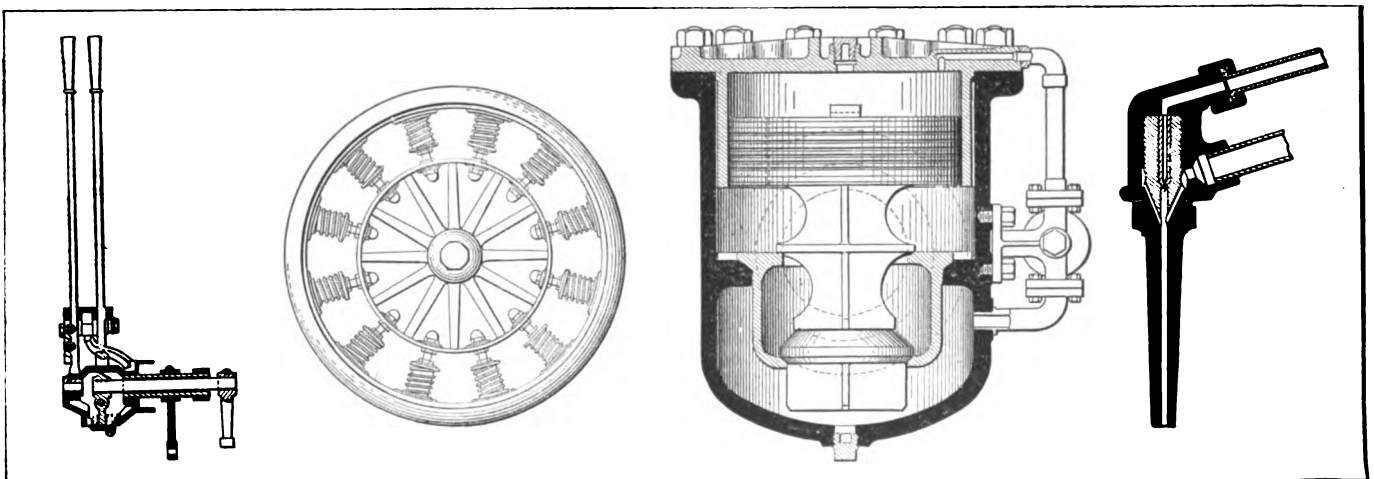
Thomas control mechanism. Fig. 2—Wall spring wheel. Fig. 3—Collin regulating valve. Fig. 4—Burdett welding torch
